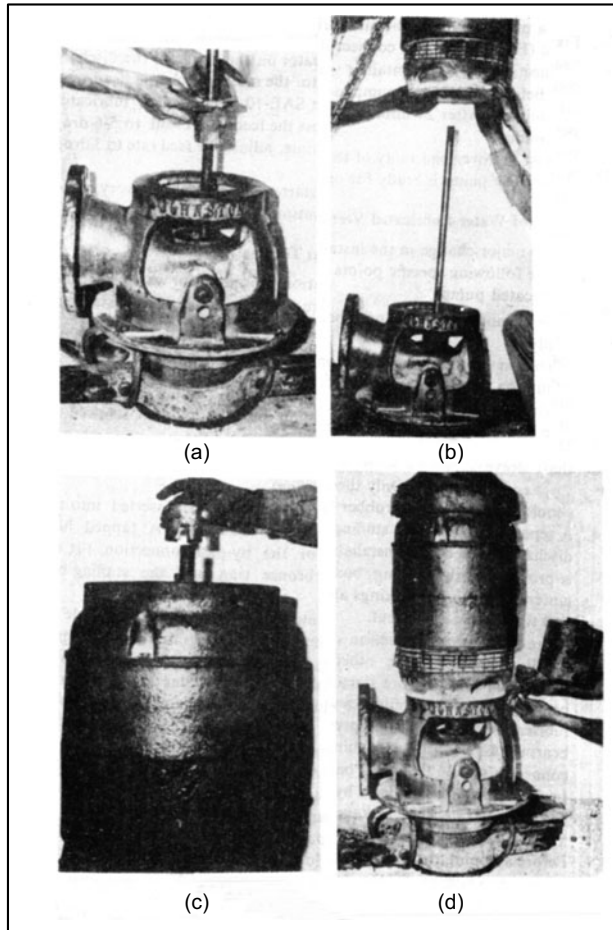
Installation of head assembly of oil-lubricated vertical turbine pump: (a) Inserting gland bush after installing the pump head on the flange coupled to the top casing pipe, (b) Lowering of vertical electric motor to the head shaft, (c) Locating the impeller adjusting nut on the head shaft, (d) Fixing the oil lubricator assembly to the discharge head.
